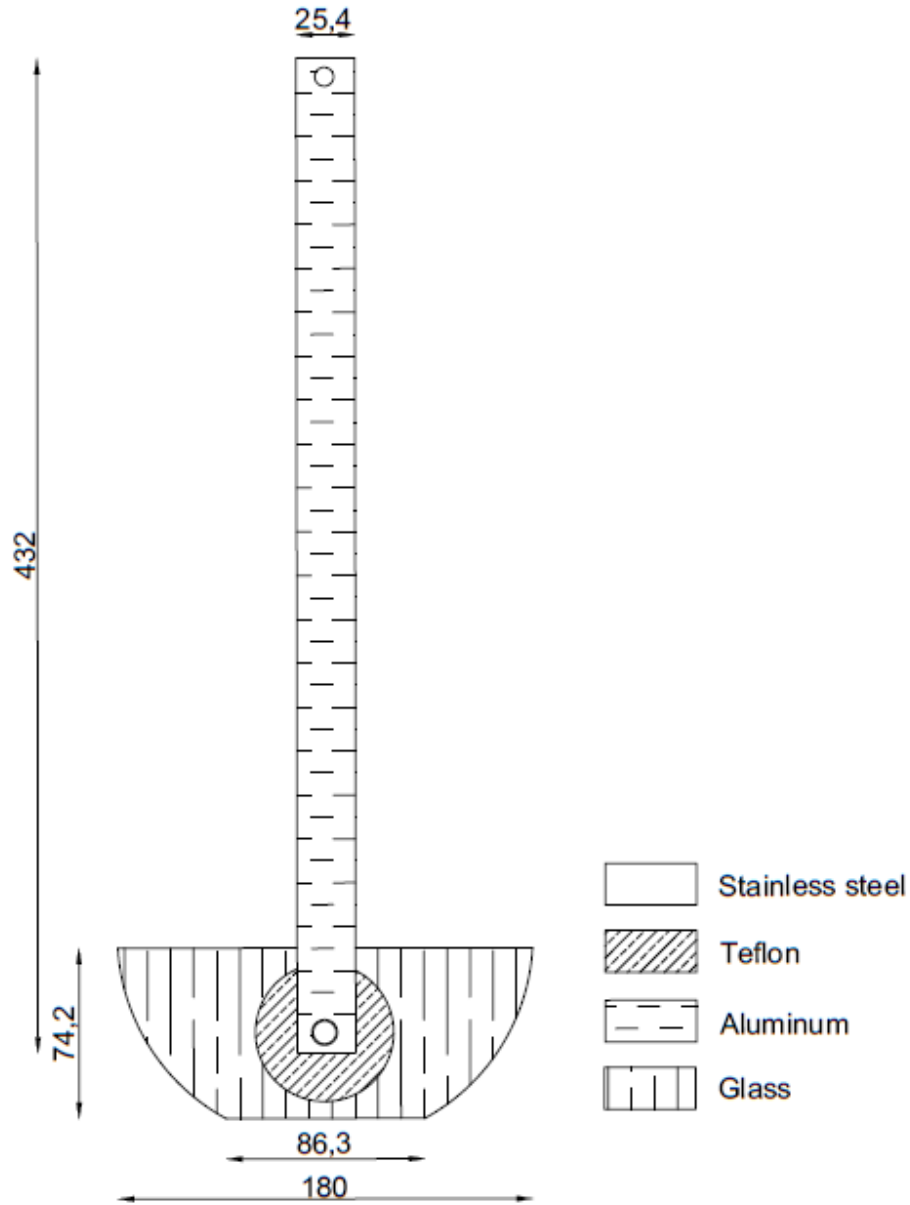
Mechanical drawing of Unit 4 – dip-coating process (Cross-sectional front view; dimensions in mm)
